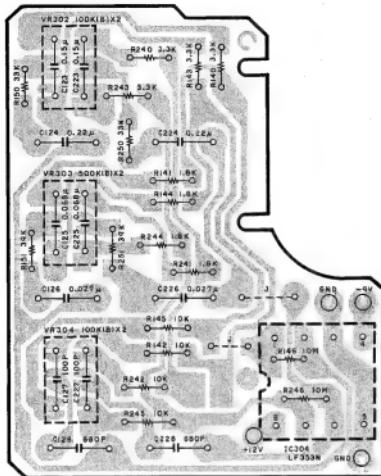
C60503551 - (TD-700 & TD-700E)
